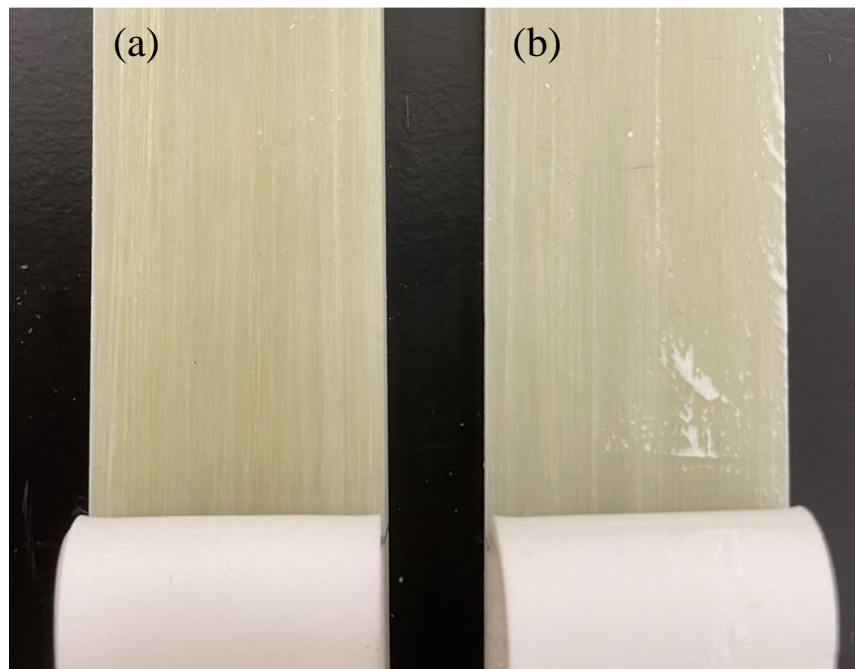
Fracture surfaces of peeled PA/TPE samples after testing. Samples processed at (a) 177°C and (b) 197°C.
